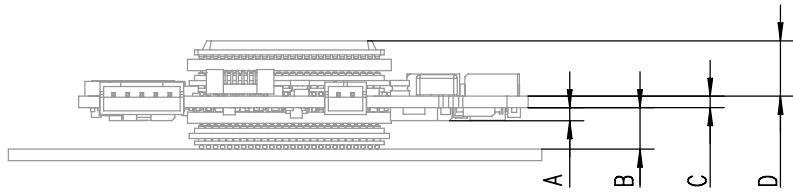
Microcontroller with BGA Adapter and Socket mounted
